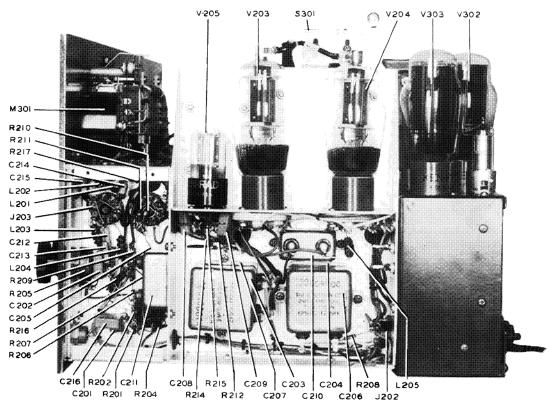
32V-2 PARTS ARRANGEMENT - RIGHT SIDE OPEN
